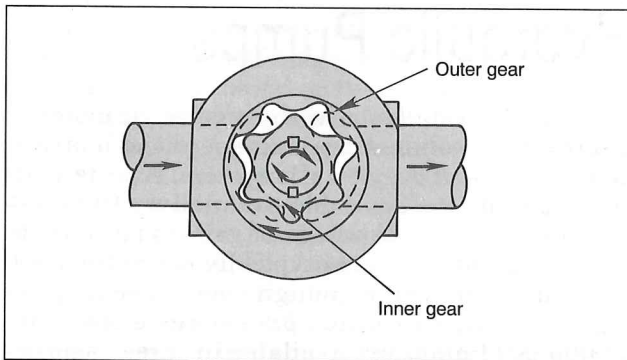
The inner gear has one tooth less than the outer gear in this gear-within-gear pump. Relative motion between the two causes pumping action.
